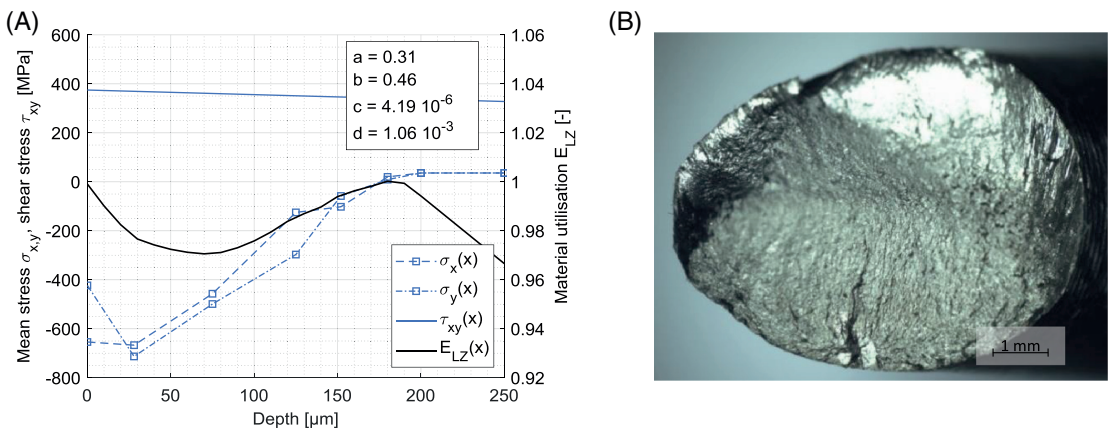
Shear fatigue testing—(A) subsurface stress state and material utilisation for a 34CrNiMo6 2D HCF specimen under 4500 N mm and (B) fracture surface of the same specimen after $3.4 \cdot 10^6$ cycles, showing crack initiation from MgO-Al₂O₃ inclusions in 0.2 mm depth
